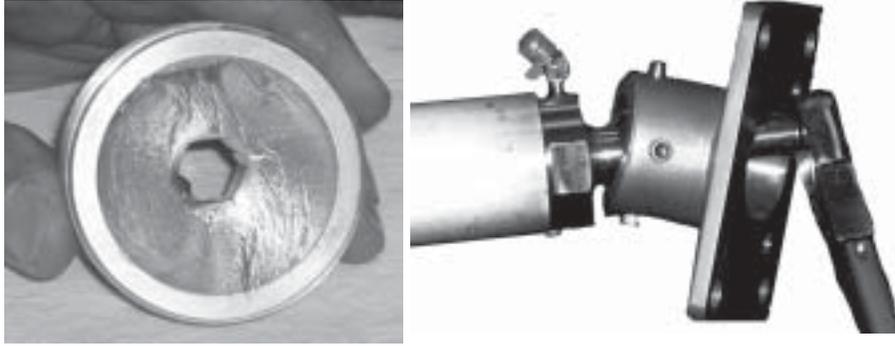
Use a 1/2" hex bit socket to tighten the large retaining nut.
